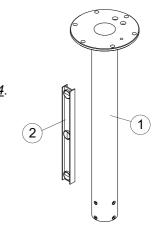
Basic dimensions of central axis for the ceiling tube D110 (DUO and TRIO)
